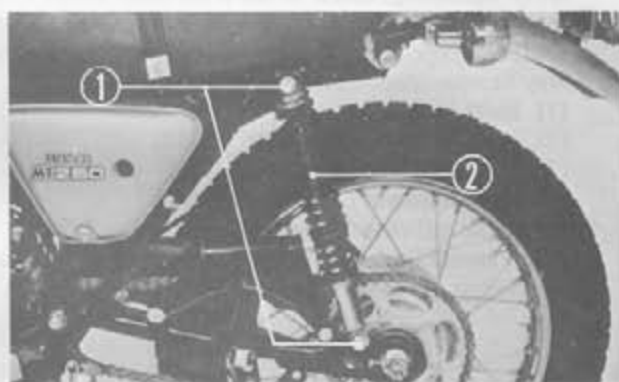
① 10mm bolts ② Rear shock absorber
